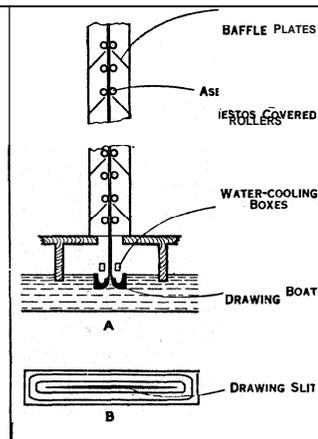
PRINCIPLE OF THE FOUR-CAULDRON SHEET-GLASS DRAWING PROCESS
